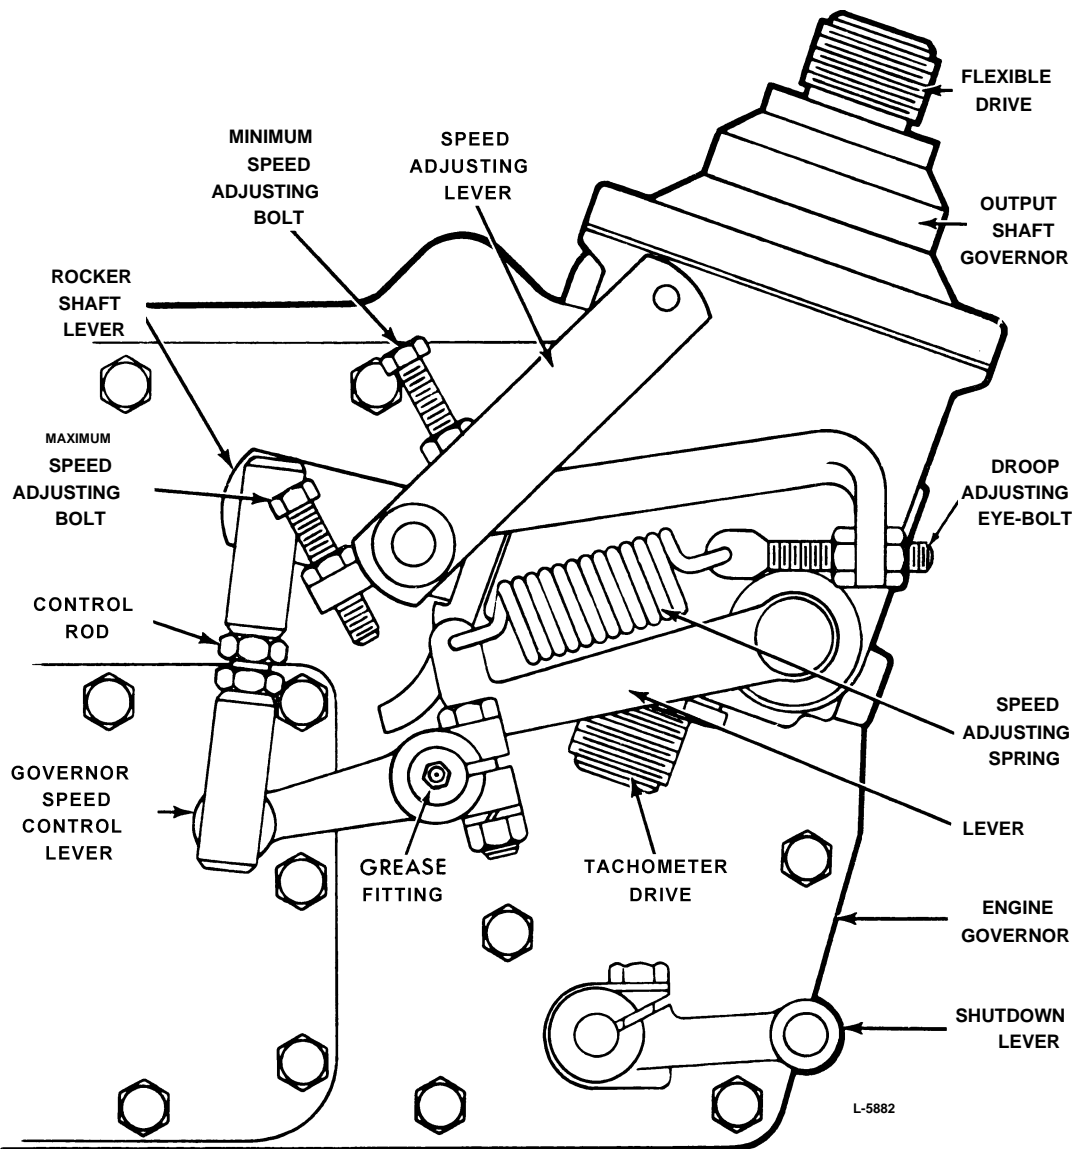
Mechanical Cable-Driven Output Shaft Governor and Linkage
